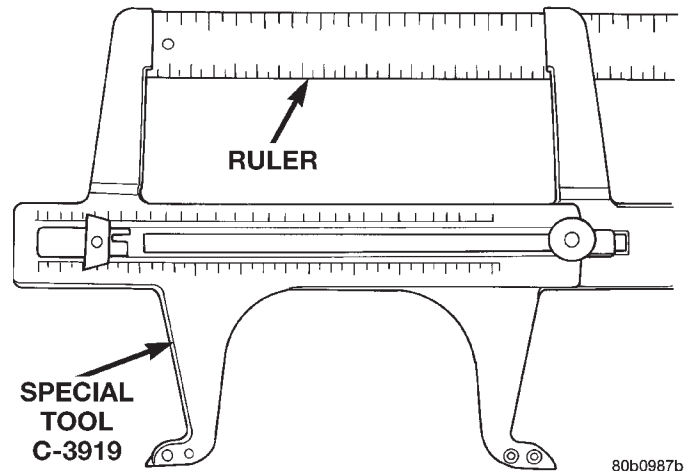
Setting Gauge To Park Brake Shoe Measurement
